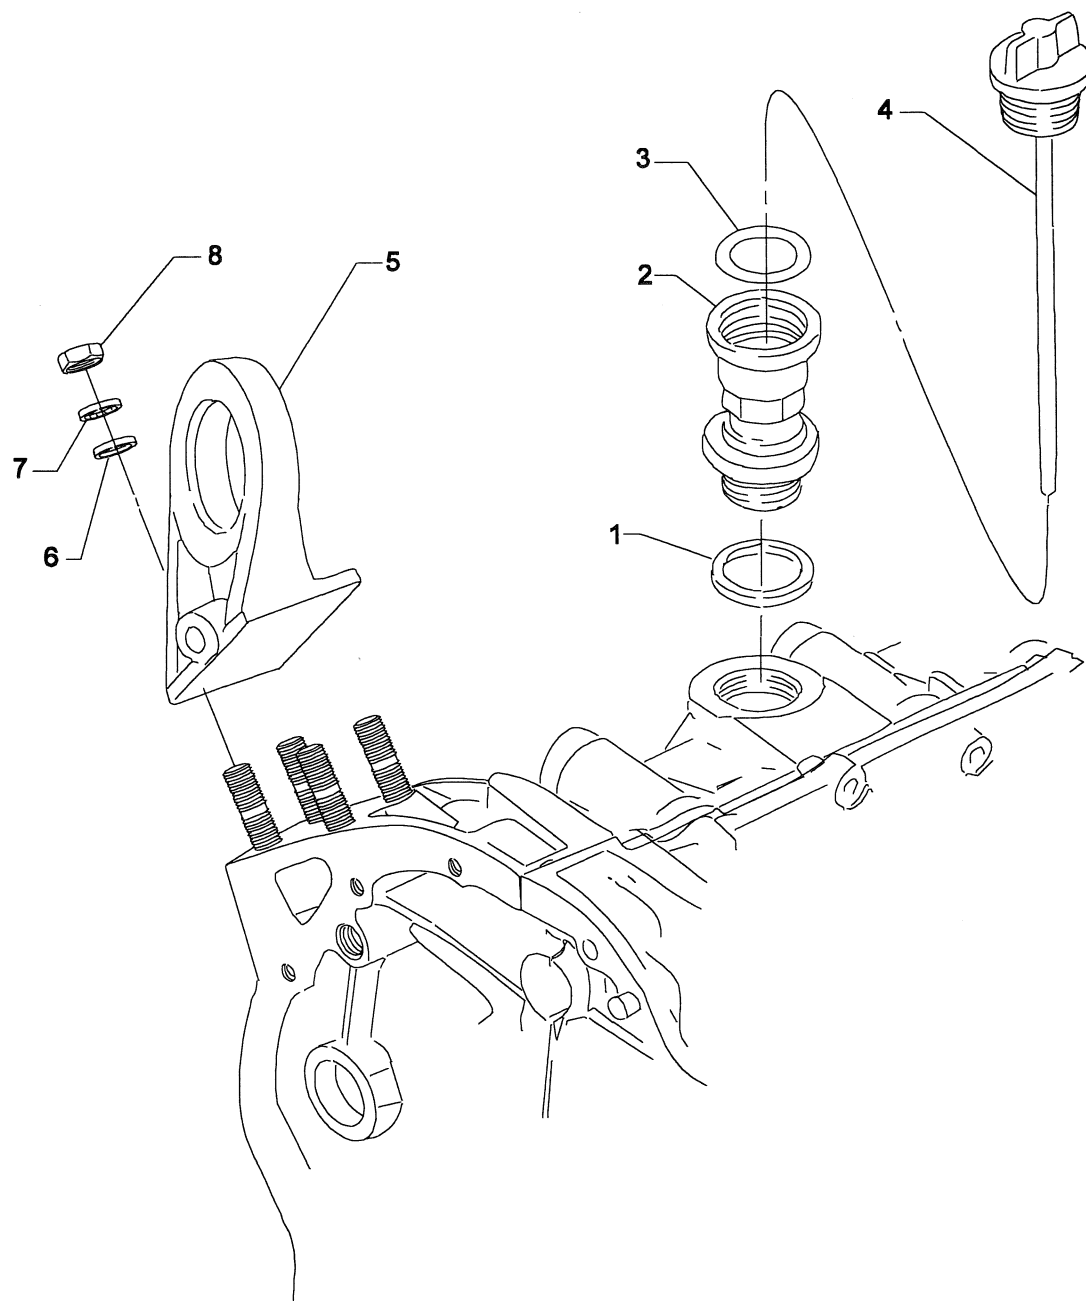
OIL LEVEL GAGE AND ENGINE MOUNTING BRACKETS
